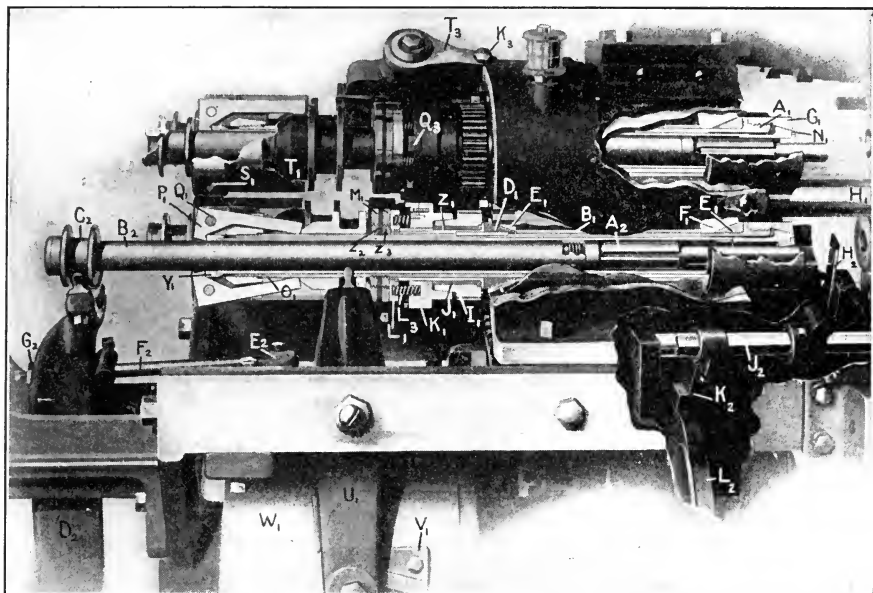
Spindle-driving and Stock-feeding Mechanism
